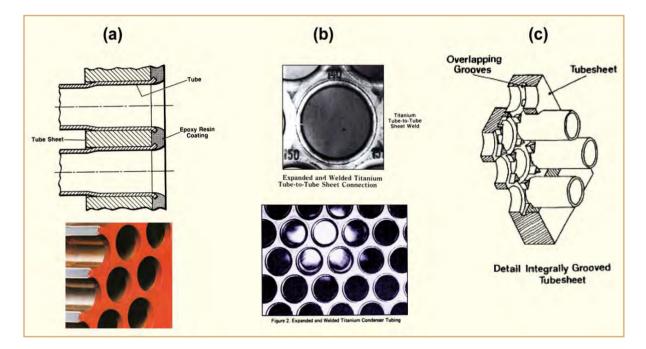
Condenser tube to tube-sheet connections: (a): tubes rolled and sealed by epoxy resin coating; (b) Tubes rolled and welded into tube-sheet (Leak tight condenser designed by Siemens-KWU); (c): Integrally grooved double tube-sheet technology [Zoerner & Termuellen, 1985].
